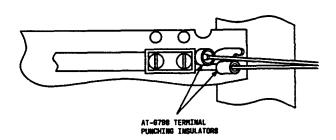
AT-6798 Terminal Punching Insulators on Protector Mounting
